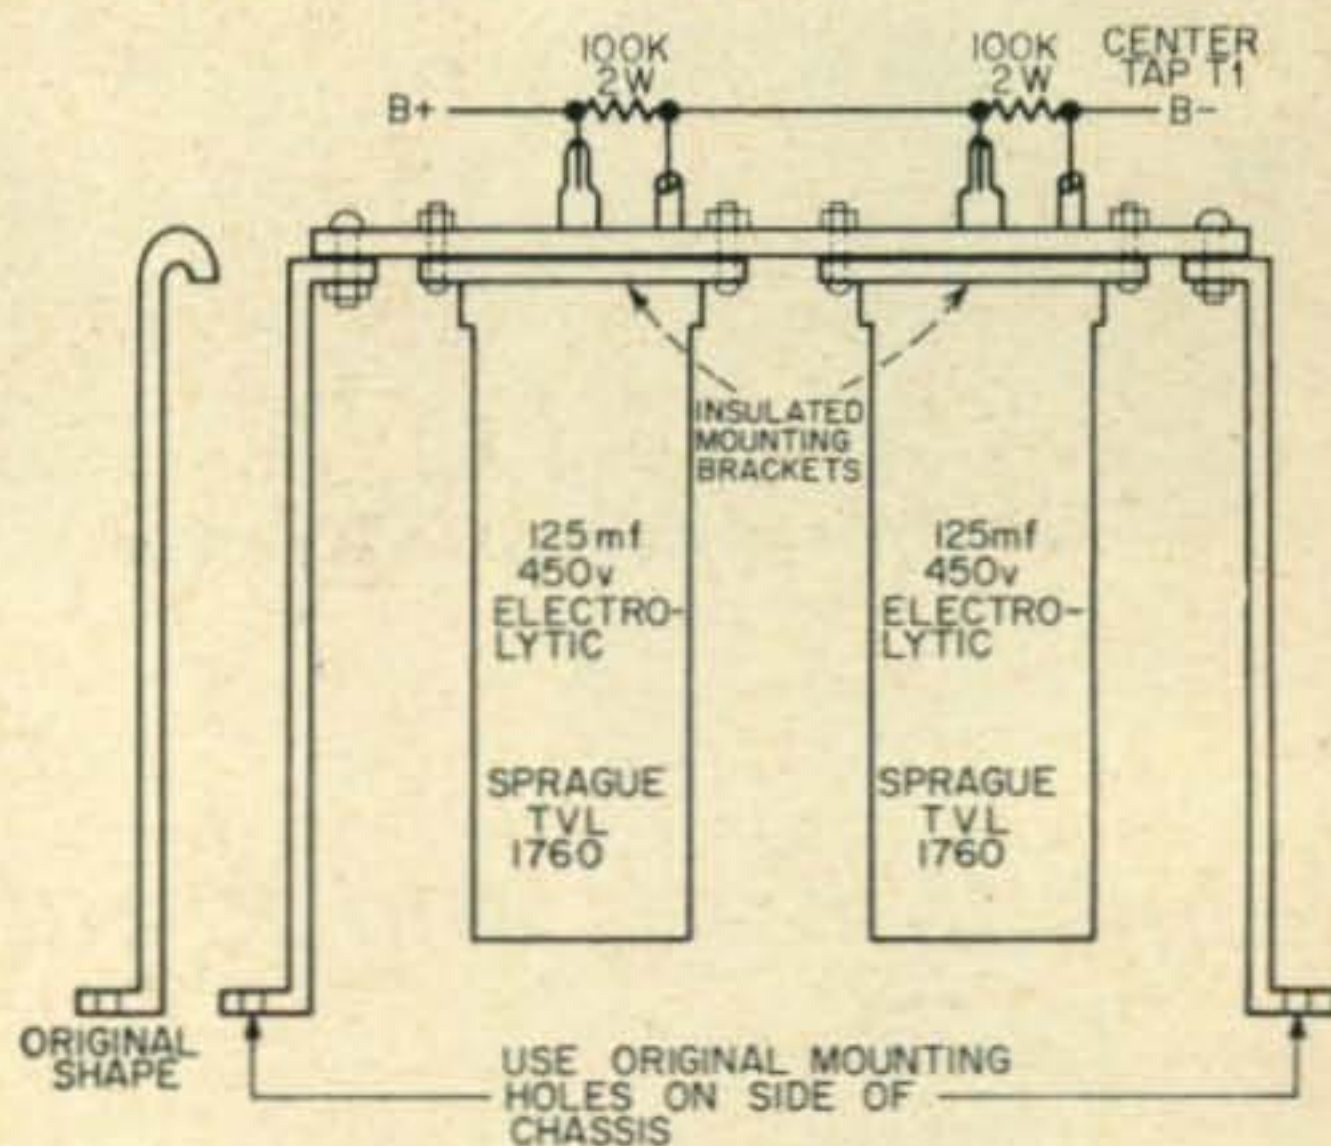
Filter assembly that replaces C9. The condenser mounting plate is secured to the brackets that held down C9 after the bracket shape is modified.
